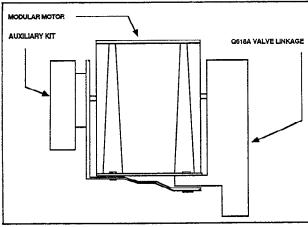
INSTALLATION OF MODULAR MOTOR AND AUXILIARY KITS ON HONEYWELL
